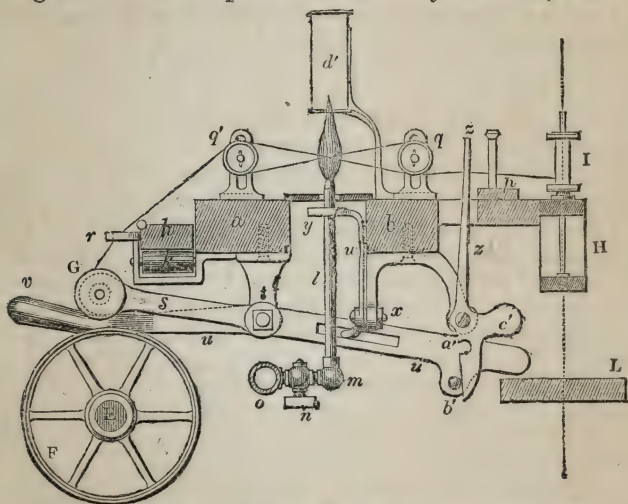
Thread Singeing Machine. Cleaning and Tricker Mechanism.
